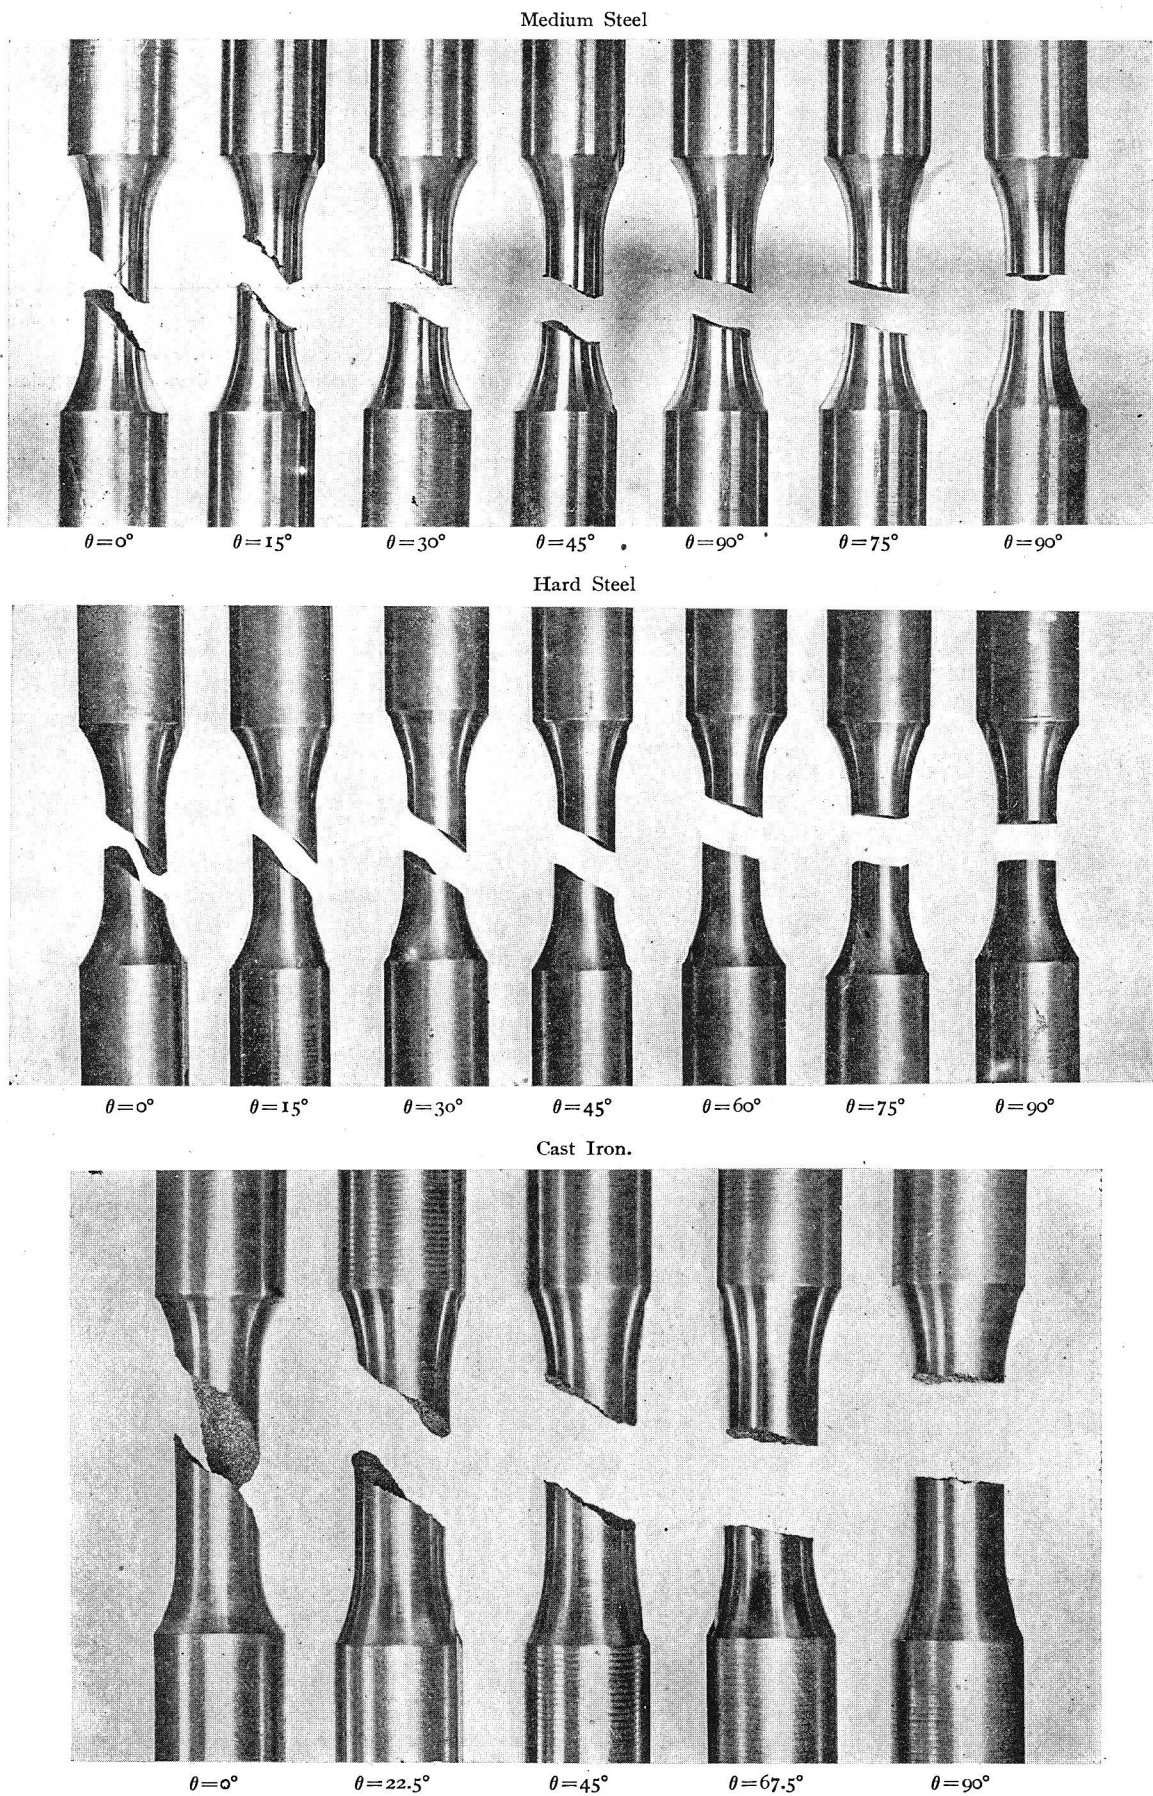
(b). Fatigue Fractures of Carbon Steels and Cast Iron.
